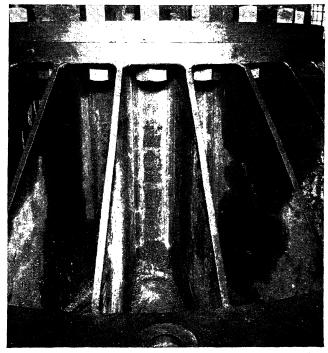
B.—Fillet-welding on lower part of an assembly unit. (Bethlehem Steel Co.)
